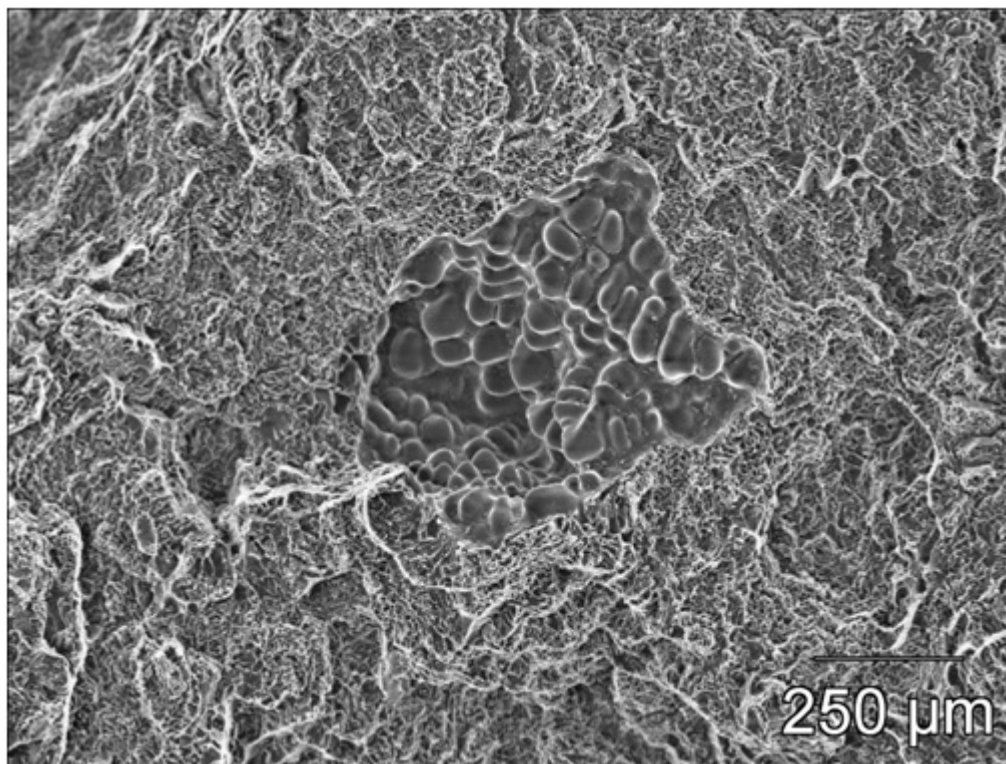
Fracture surface of machined 356-T6 tensile test specimen.
